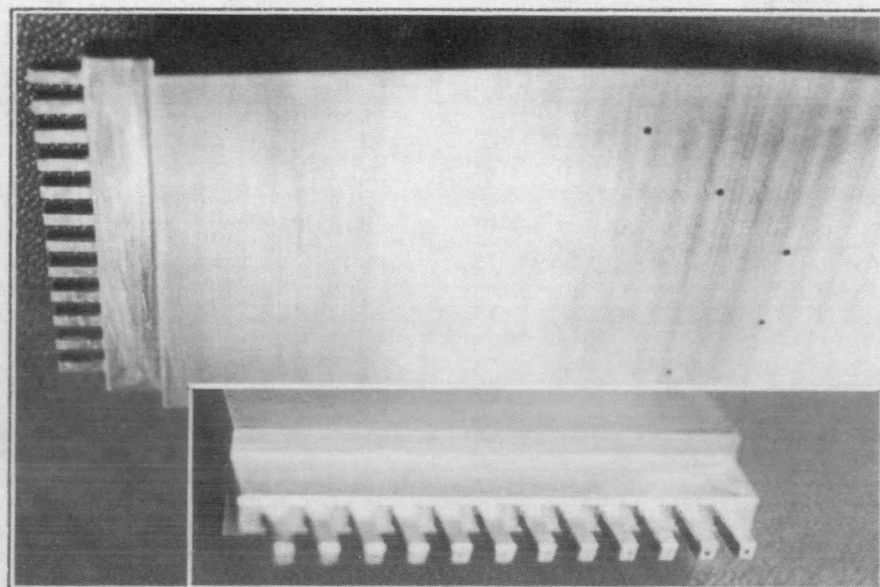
Combs cut on forward edge of segment 4M. (inset) frontal view of combs
